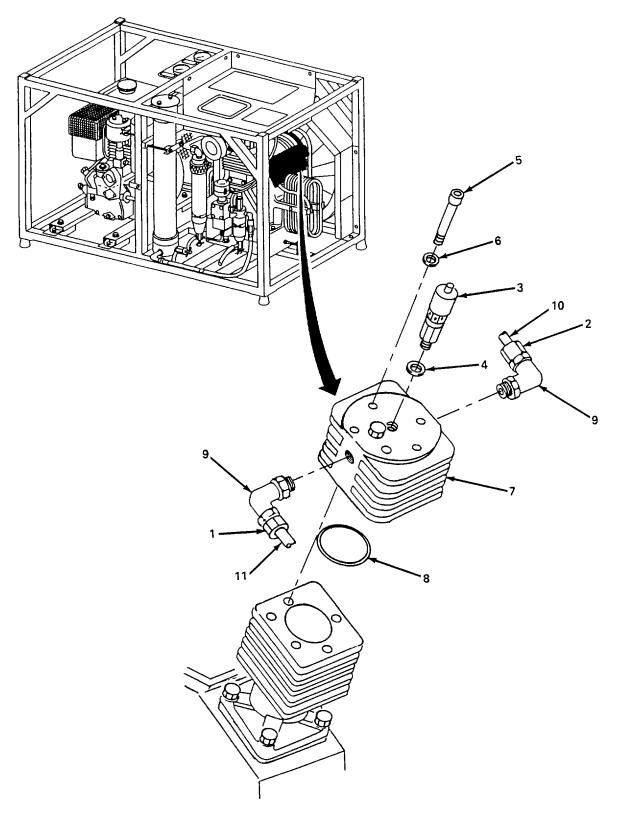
Second Stage Valve Head Assembly, Replace.
